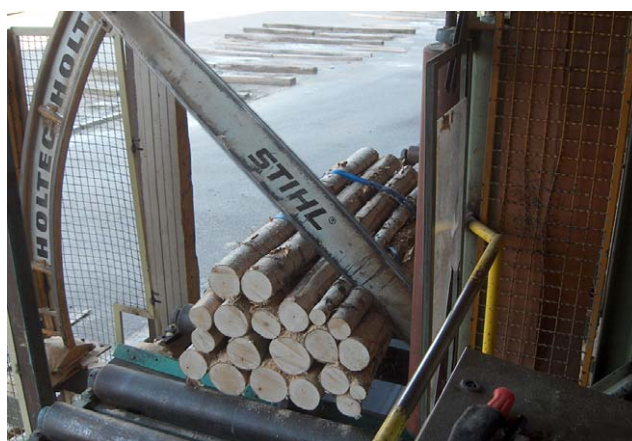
Cross-cutting device for board bundles. Manufacturer: Holtec. © Ari Erkkilä.
